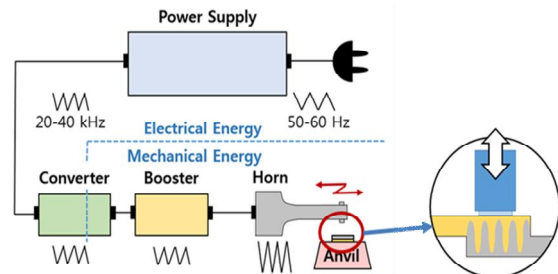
Schematic diagram of the ultrasonic metal welding
